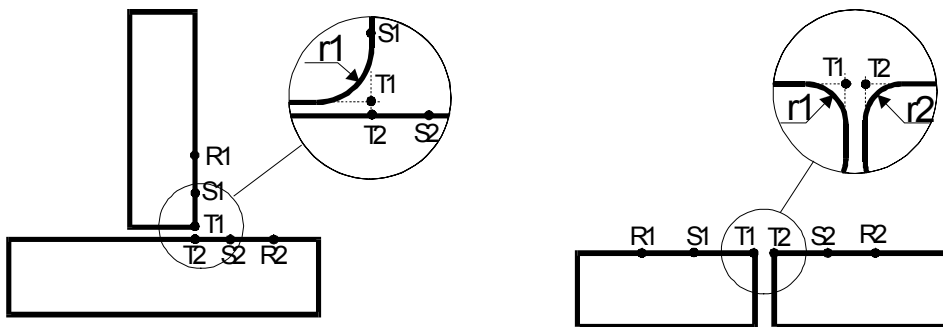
R, S and T points for description of the weld groove profiles for flange- and flank-joints when there are no bevel shapes.
